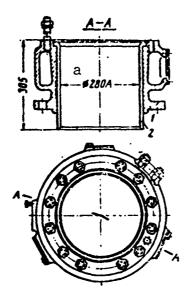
Cylinder of first stage: 1) cyl-inder; 2) bushing. a) Diameter.
